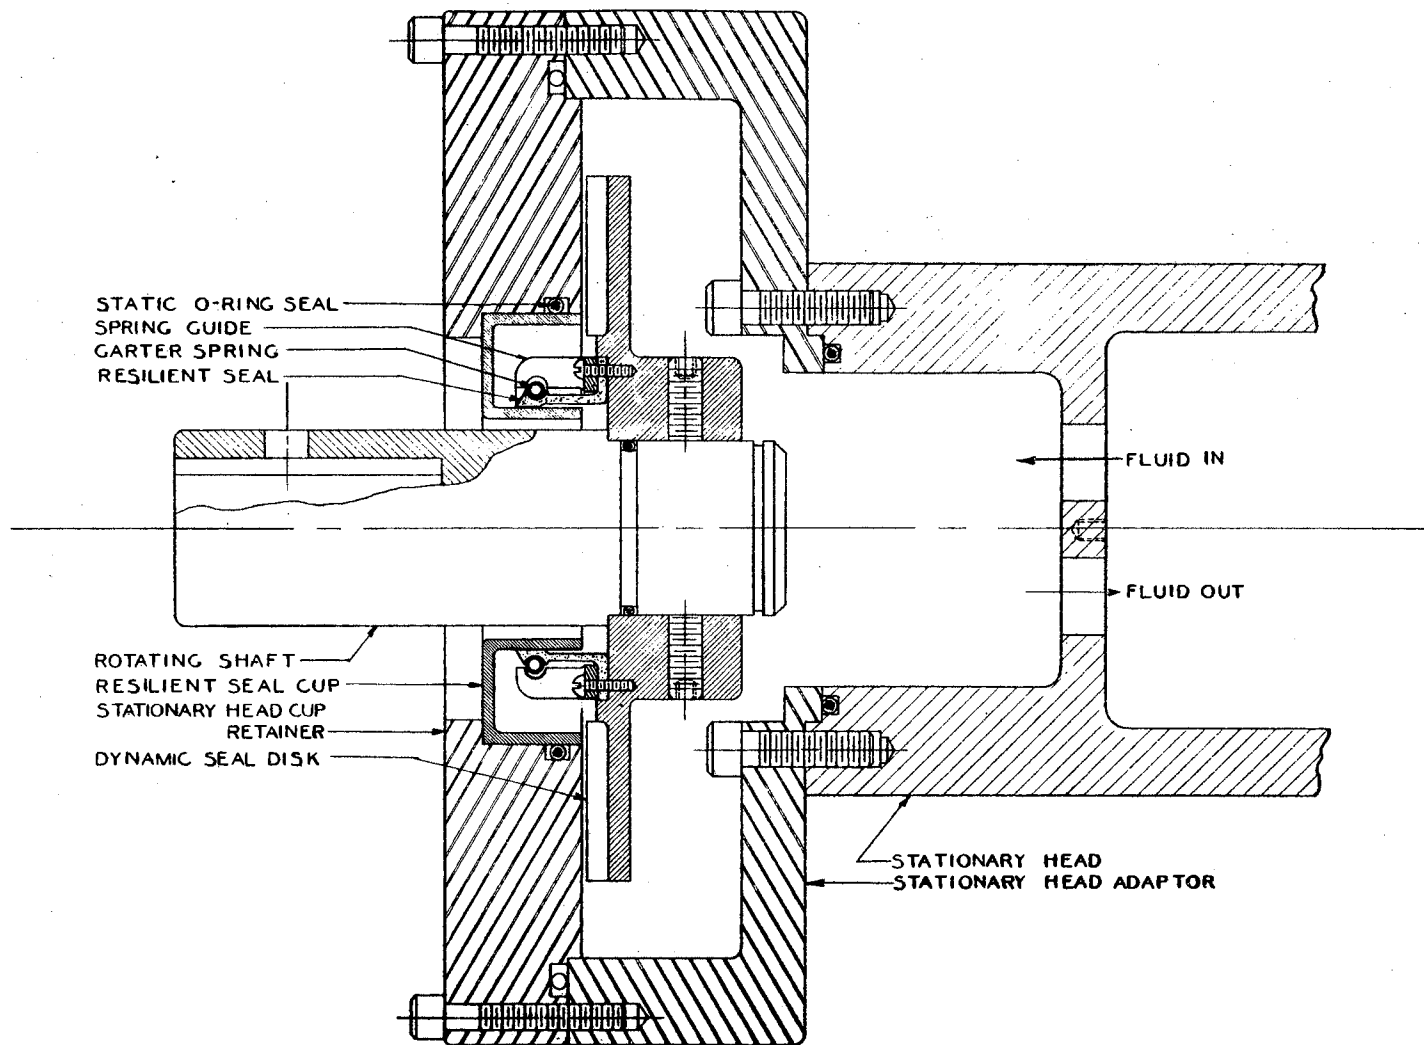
Cross-Sectional View of Automatic-Disengaging Dynamic Seal.
